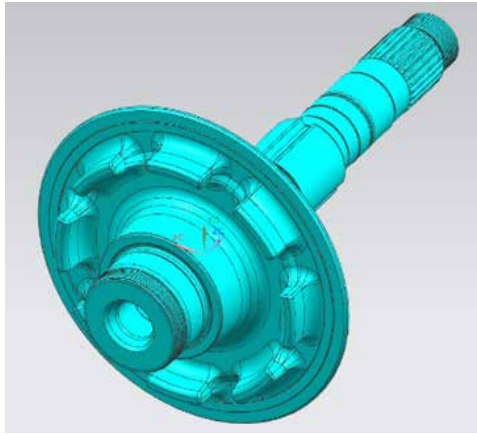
Integrated parking gear with bottomless teeth and fixed pulley half
